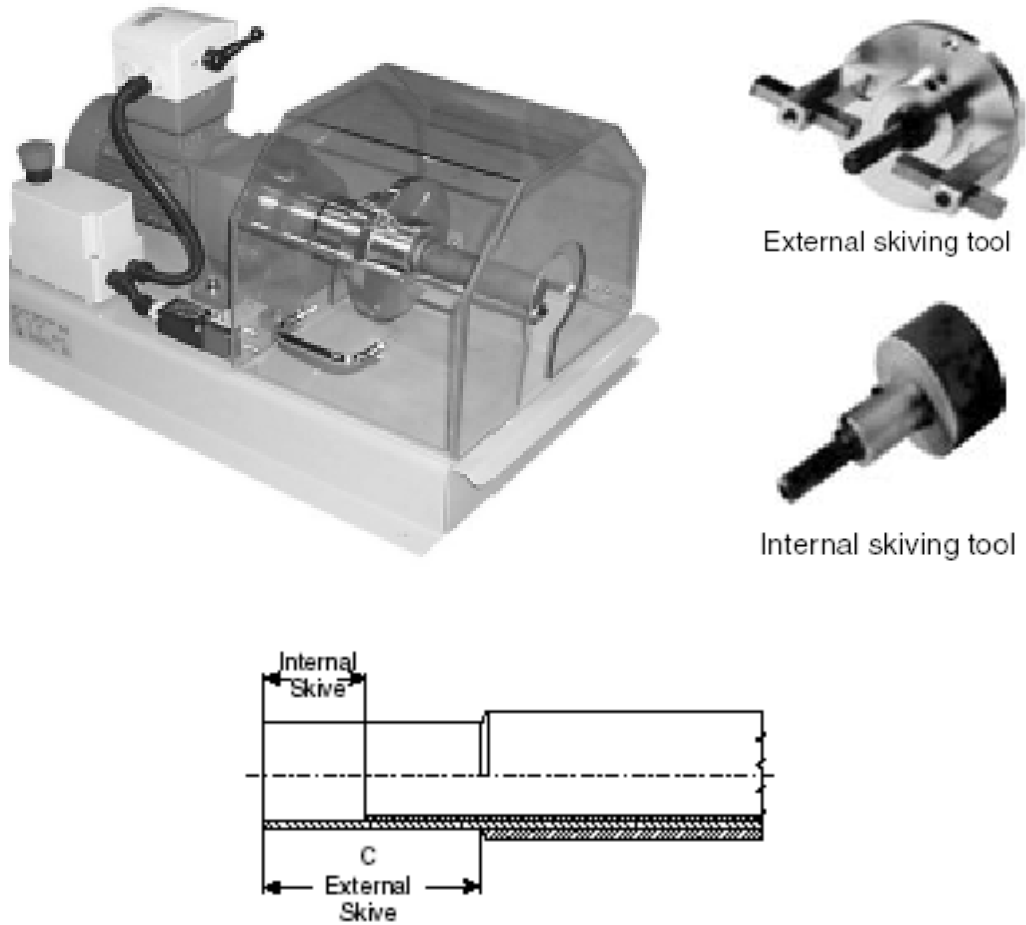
Machinery used for accurate hose skiving, both internal and external
